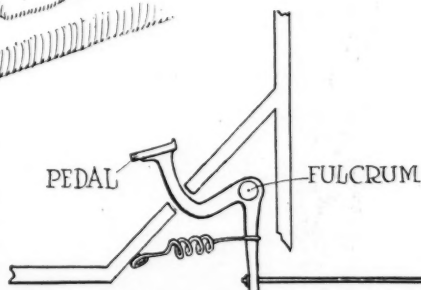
ACCELERATOR PEDAL ARRANGEMENT
